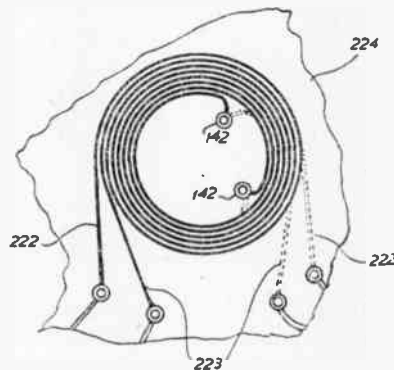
Plan of double spiral coils deposited on a moulded plate.
